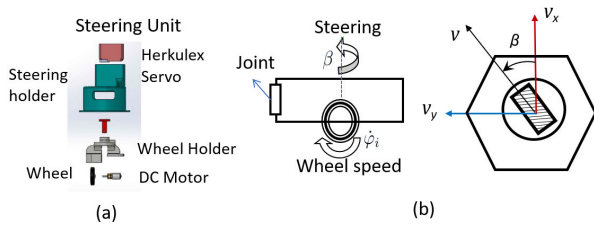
(a) CAD module of the Steering module (b) kinematics diagram of the steering module of the hTrihex platform.
